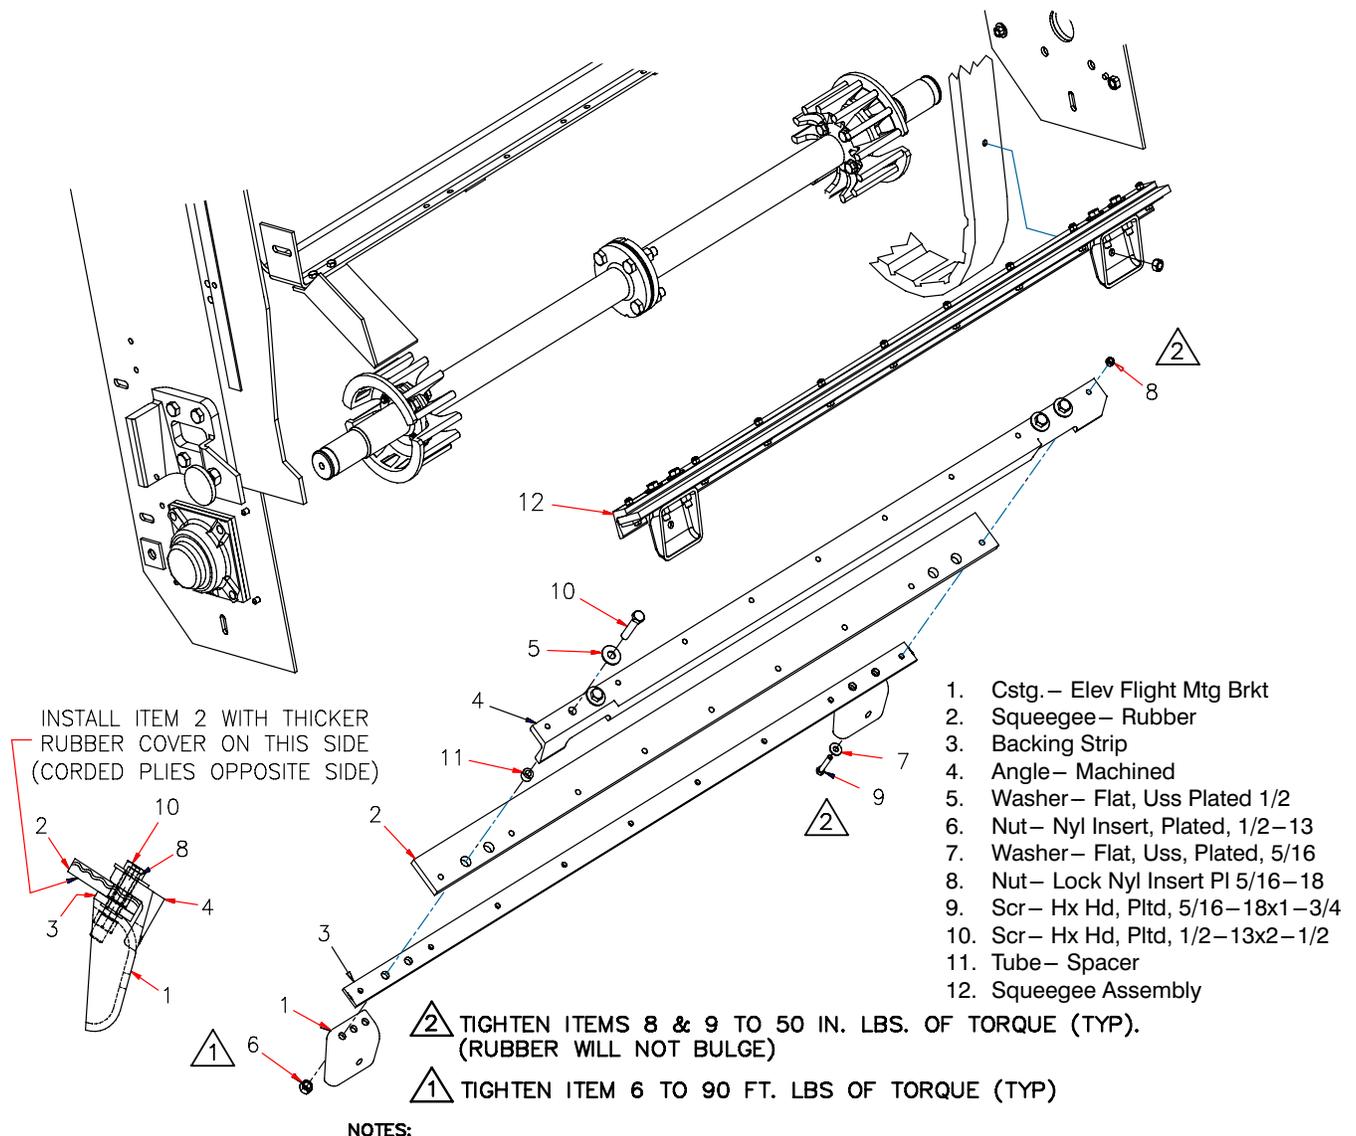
A Each Elevator Squeegee Bar Assembly is attached to the left and right elevator belts. It is not necessary to remove the elevator belt assembly in the elevator to replace squeegees.
